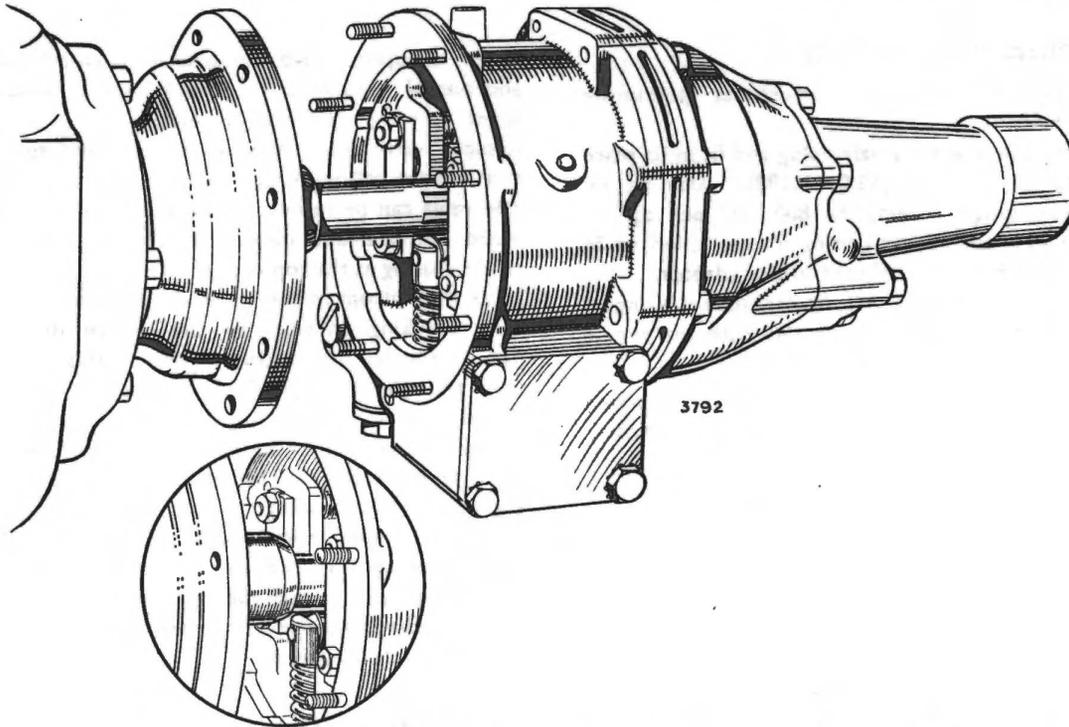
Overdrive ready for fitting to gearbox (Later units are fitted with an external balance pipe and a plug replaces the breather)
